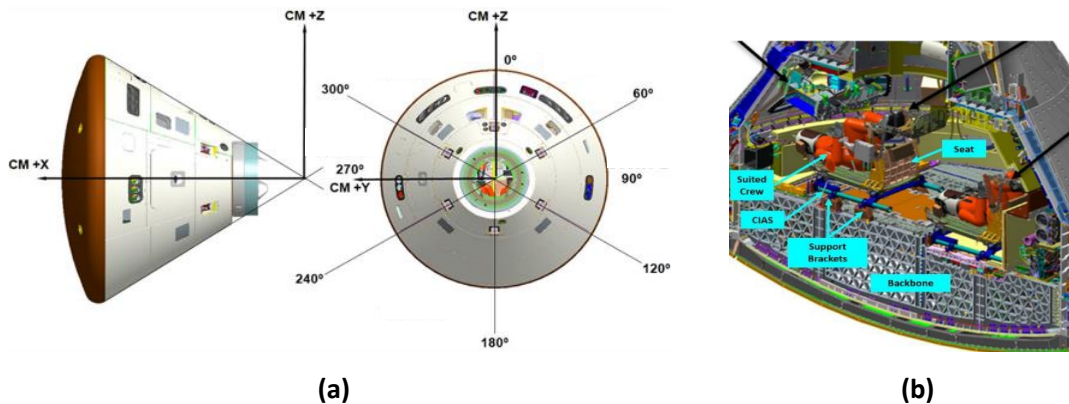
Orion Crew Module (a) side and top views, and (b) cross-section internal view showing one upper and one lower seat with suited crew members.
